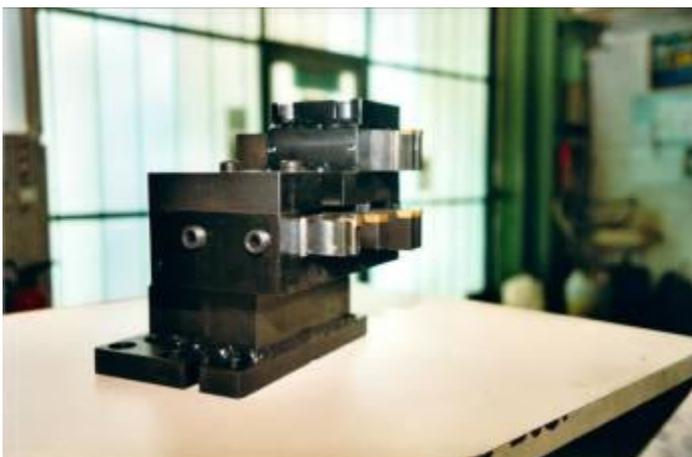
The circulation of the tool holder was still eingeschabt so that no air gap, with vibrations of the tools that could affect the machining.
